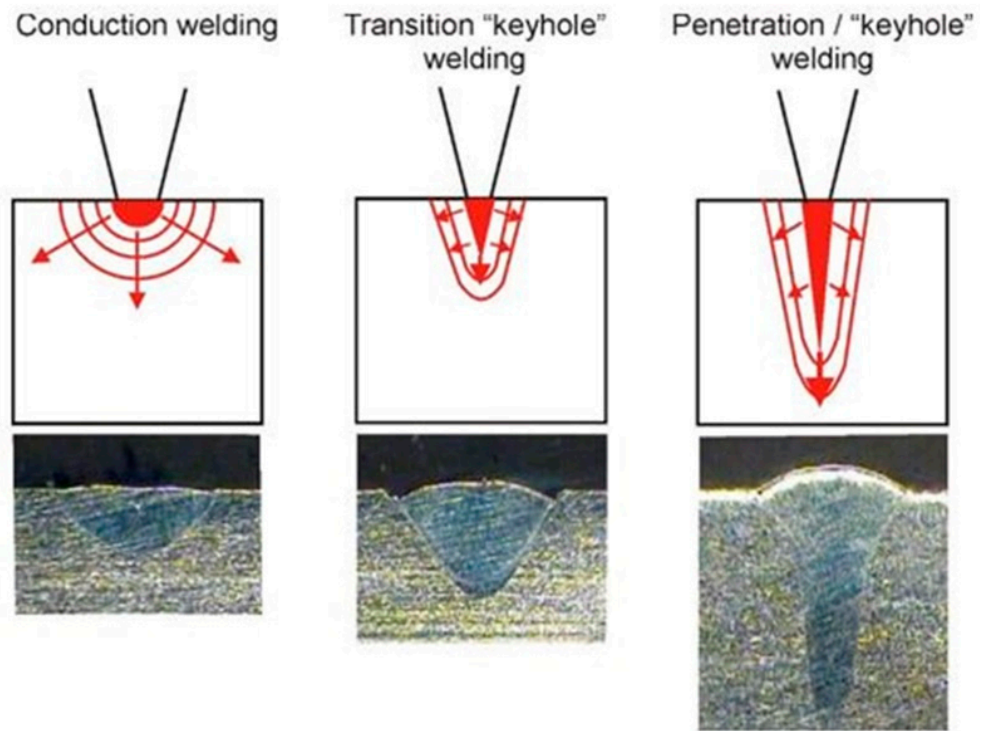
The three modes of laser welding (accessed 20 April 2023). Reproduced with permission from [76], AMADA WELD TECH Inc., 2016.
